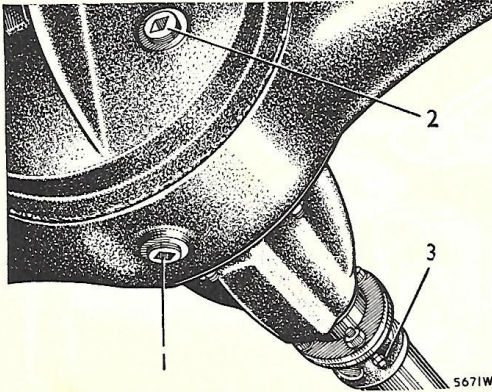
The rear axle drain plug (1), filler plug (2) and the propeller shaft rear universal joint lubrication point (3).
